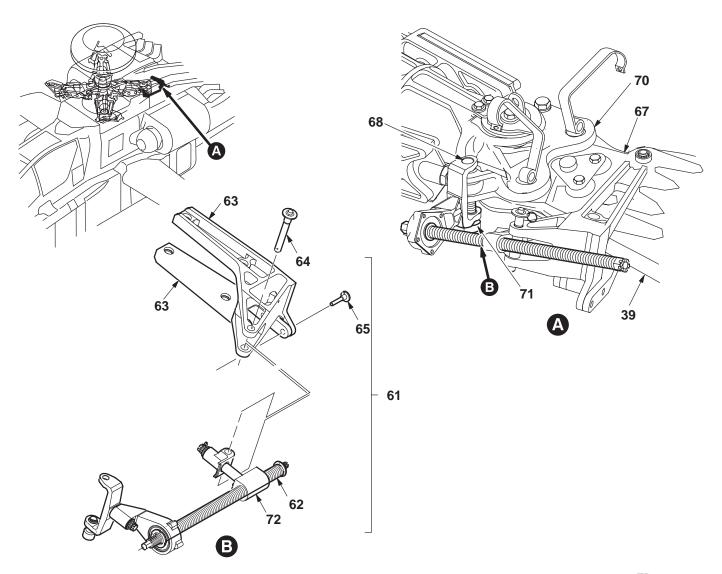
Blade Positioning Assembly on L/H AFT Main Rotor Blade
